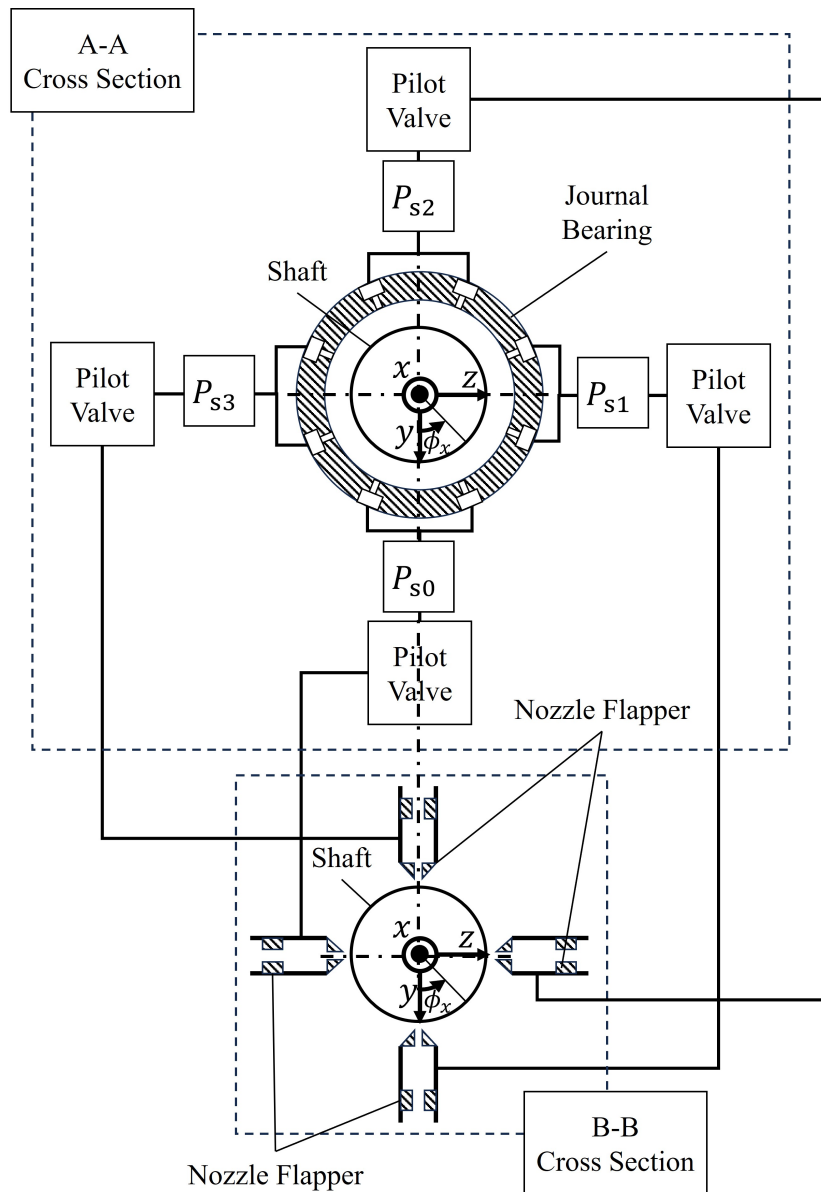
Structure and parameters of pneumatic control circuit with nozzle flapper, pilot valve and journal bearing.
